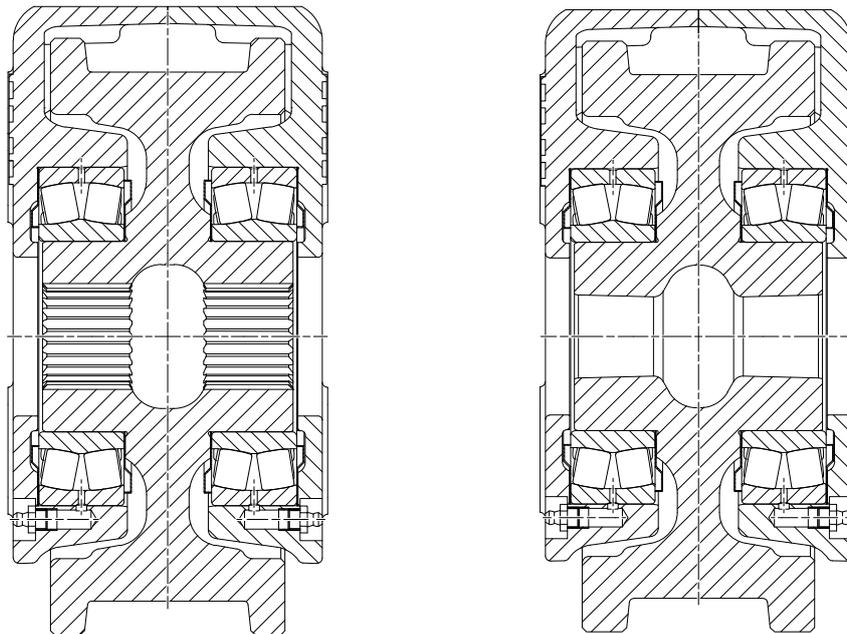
Drivable wheel block (left) and non-drivable wheel block (right)
